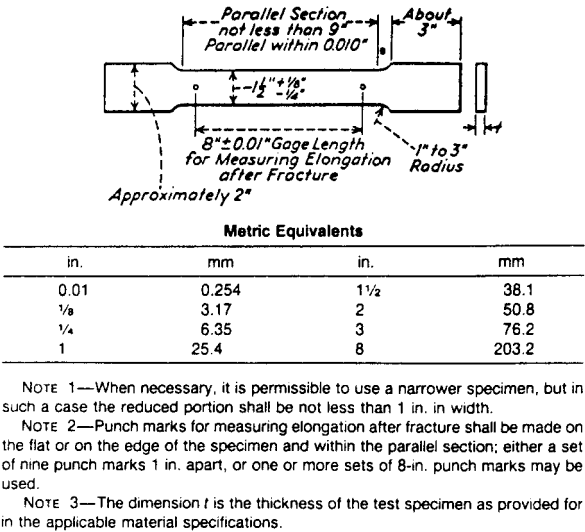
STANDARD RECTANGULAR TEST SPECIMENS WITH 8 IN. GAGE LENGTH
